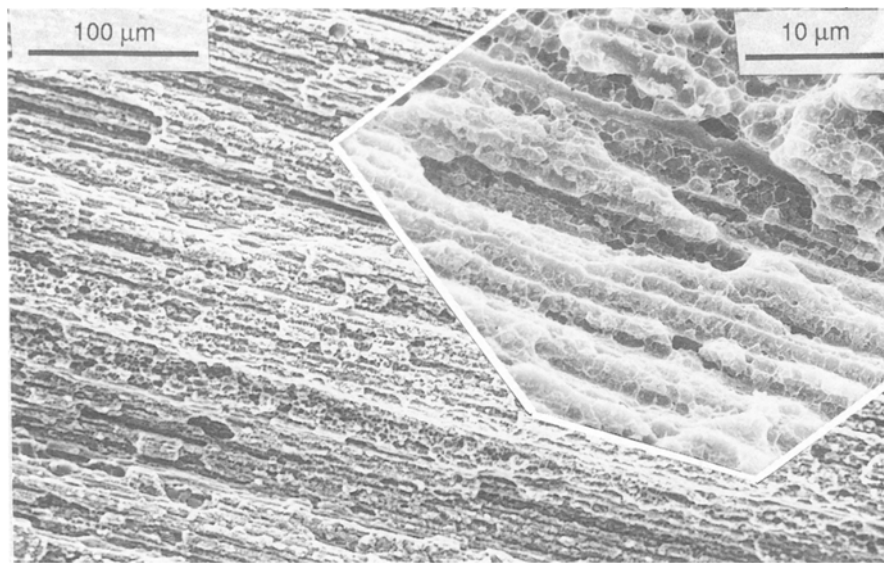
Fracture surface (parallel to extrusion direction) of short-rod fracture toughness specimens of 400° C extrudate (SEM).
